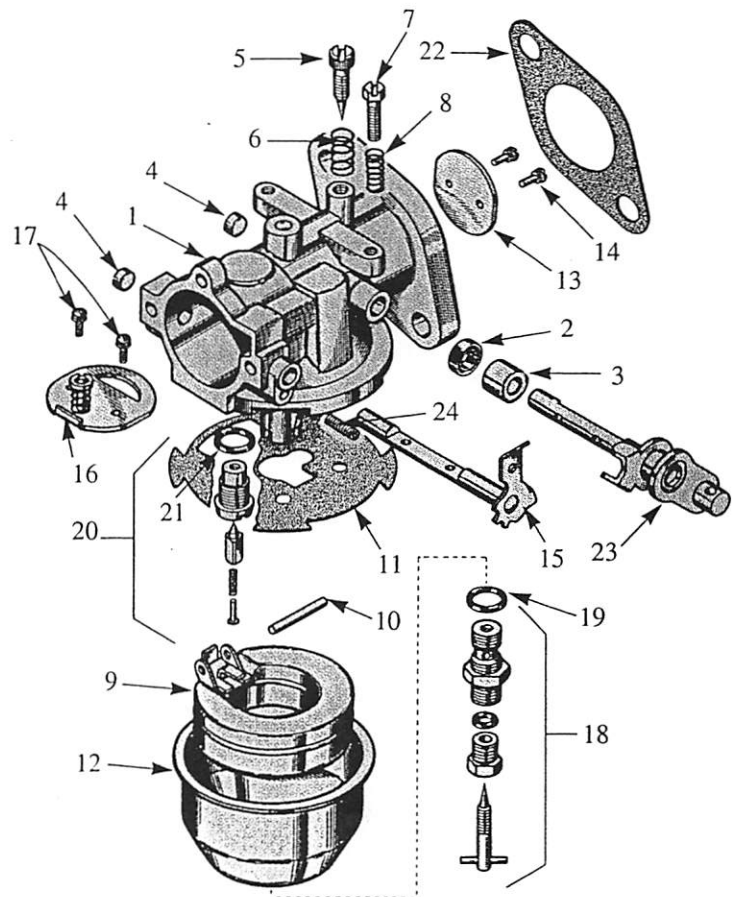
An exploded view of natural draft carburetor: 1—Throttle body. 2—Seal. 3—Retainer. 4—Cup rings. 5—Idle adjustment needle. 6—Spring. 7—Throttle stop screw. 8—Spring. 9—Float and hinge assembly. 10—Float pin. 11—Gasket. 12—Fuel bowl. 13—Throttle valve. 14—Screw. 15—Lever and shaft assemble for choke. 16—Choke valve. 17—Screw. 18—Main jet and adjustment assembly. 19—Washer. 20—Fuel valve and seat assembly. 21—Gasket. 22—Flange gasket. 23—Throttle shaft and lever assembly. 24—Spring. (Zenith Div., Bendix Corp.)
